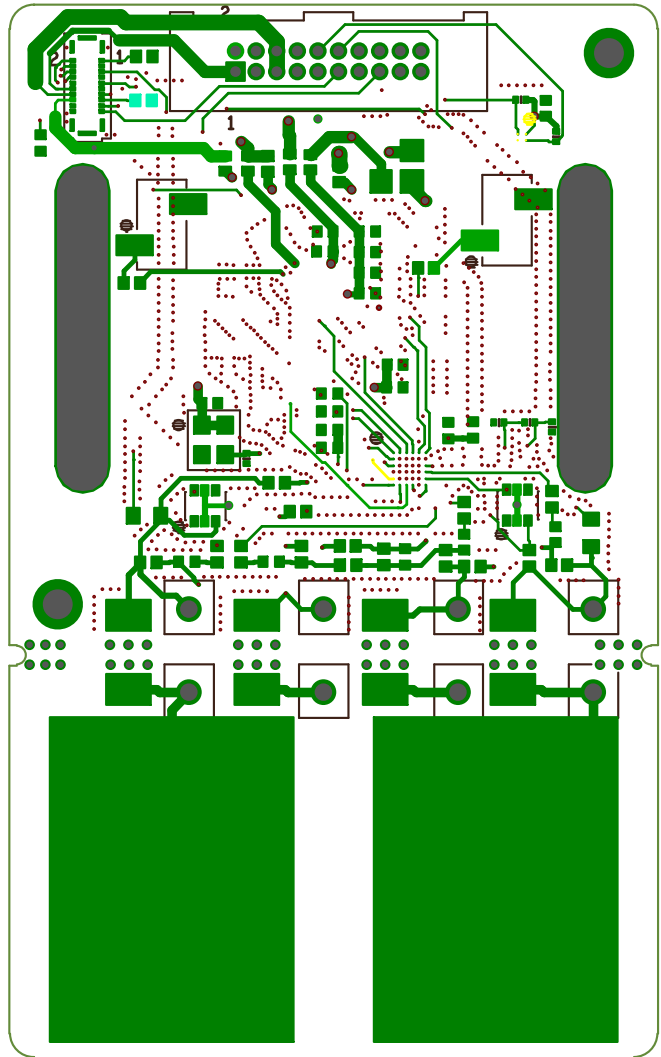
EVAL-ADPD7000Z PCB Layout: Top
